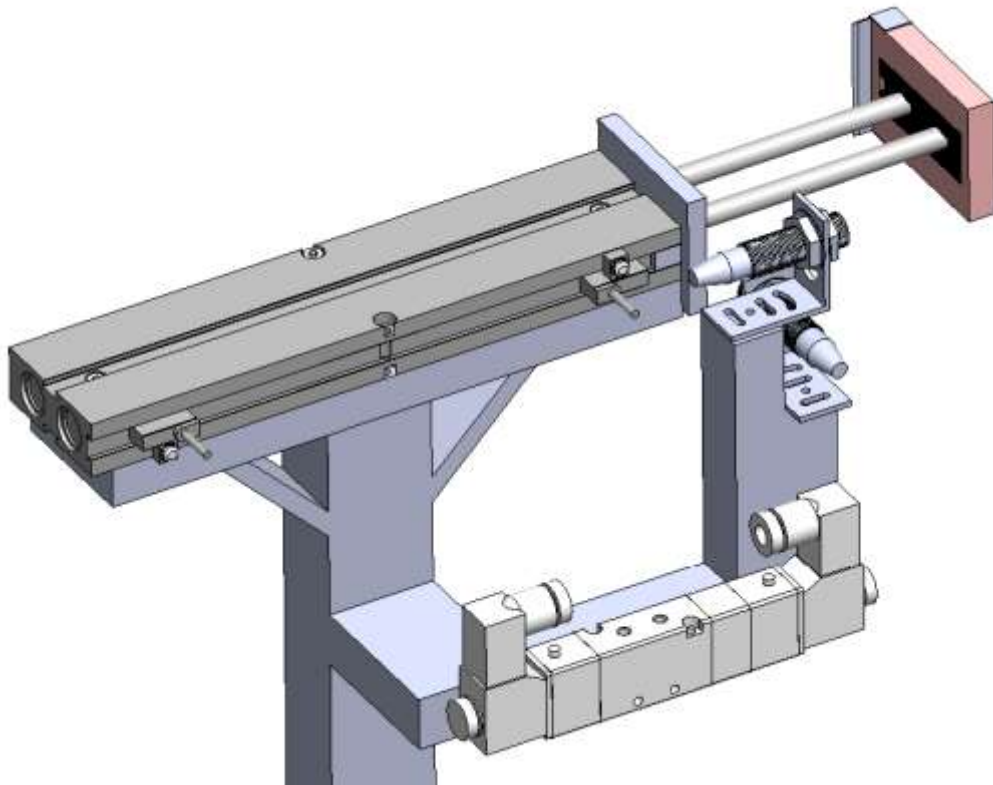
PE film holding and cutting mechanism in SolidWorks
